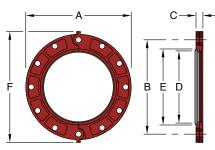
Flange Adapters (PN10/PN16 BS 4504) Tech Data Sheet: G150
